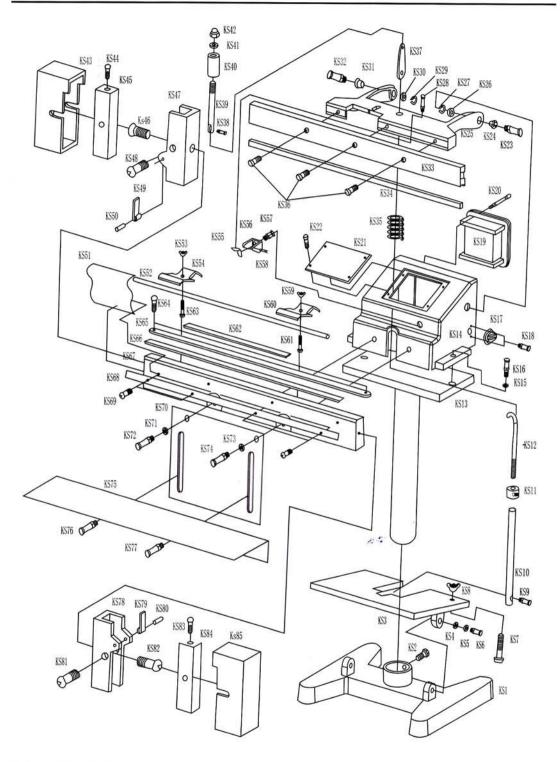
SHAFTS DIAGRAM FOR KS-F IMPULSET SEALER
